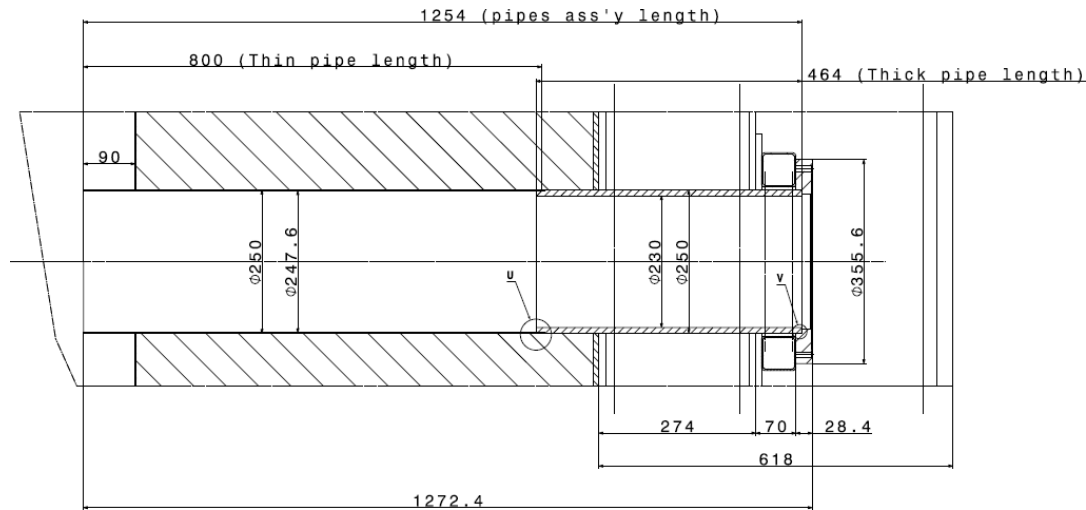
Draft drawing of the cryostat crossing tubes. The hatched region is the cryostat insulation. Units are mm. Points labeled “u” and “v” are welds.
